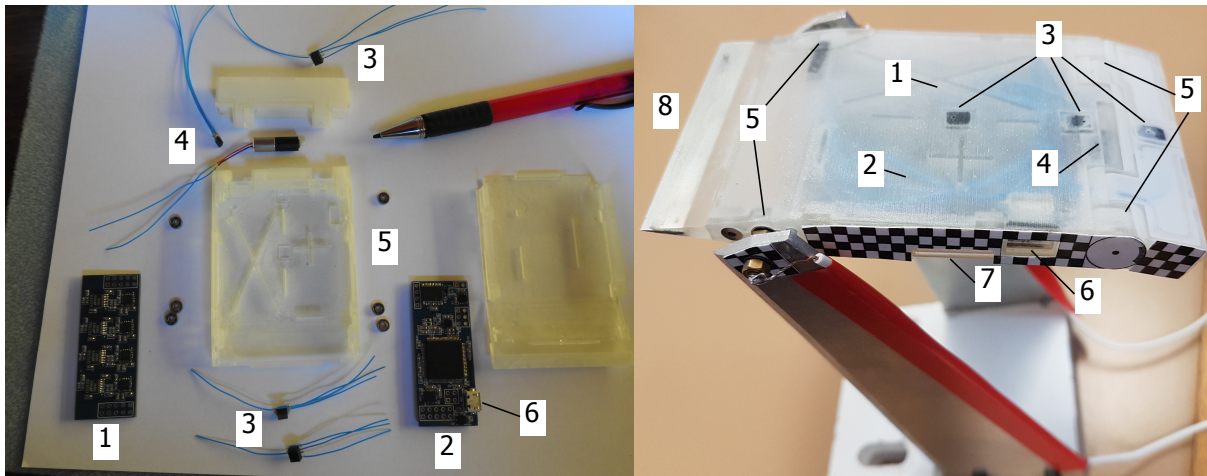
Image of the model during and after assembly. Parts are 1: AFE board. 2: MCU mainboard containing IMU, motor driver and data-logger. 3: Pressure transducers. 4: motor and position sensor. 5: 2 mm ball bearings. 6: Comm port. 7: SD card slot. 8: Sharpened aluminium alloy leading edge.
